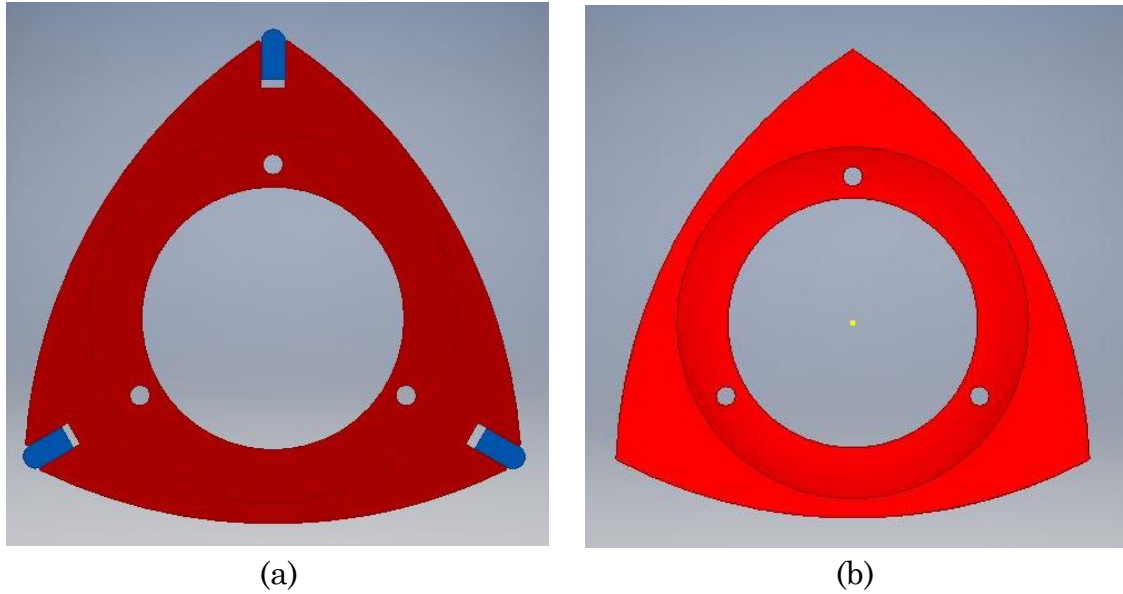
CAD of a Wankel expander rotor (a) with apex seals and (b) without apex seals
